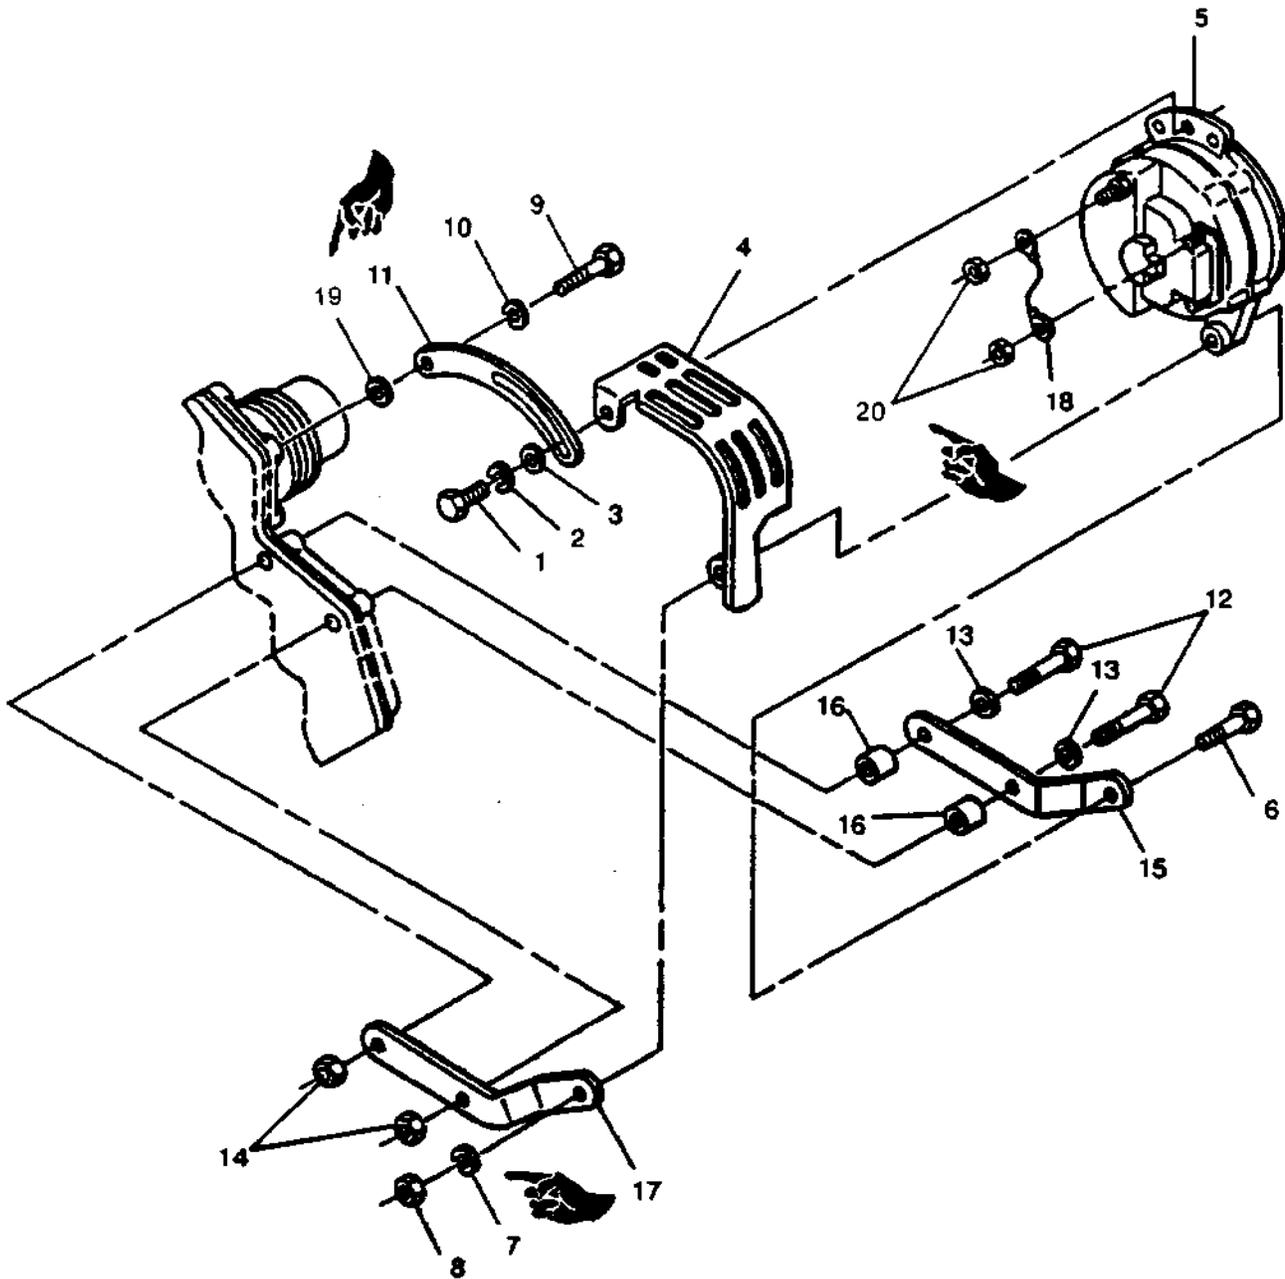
Battery Charging Alternator and Mounting Brackets
